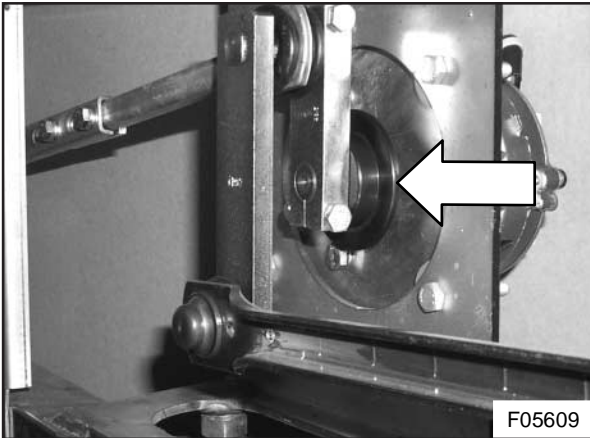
Wiper motor dust cap installation (shown on the coach)
